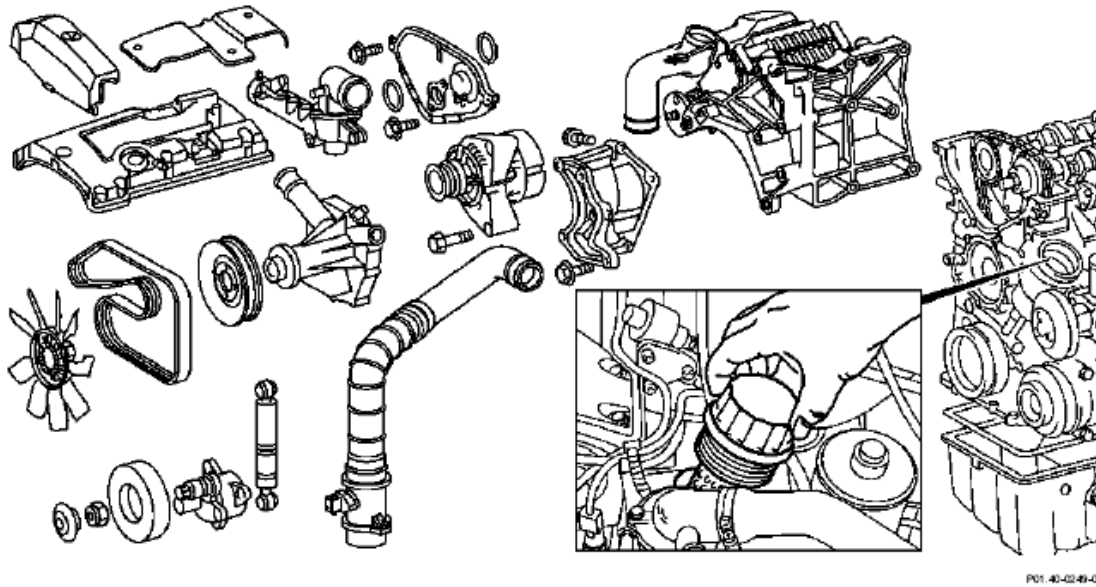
Identifying Timing Case Cover Remove/Install Components (1 Of 4)
